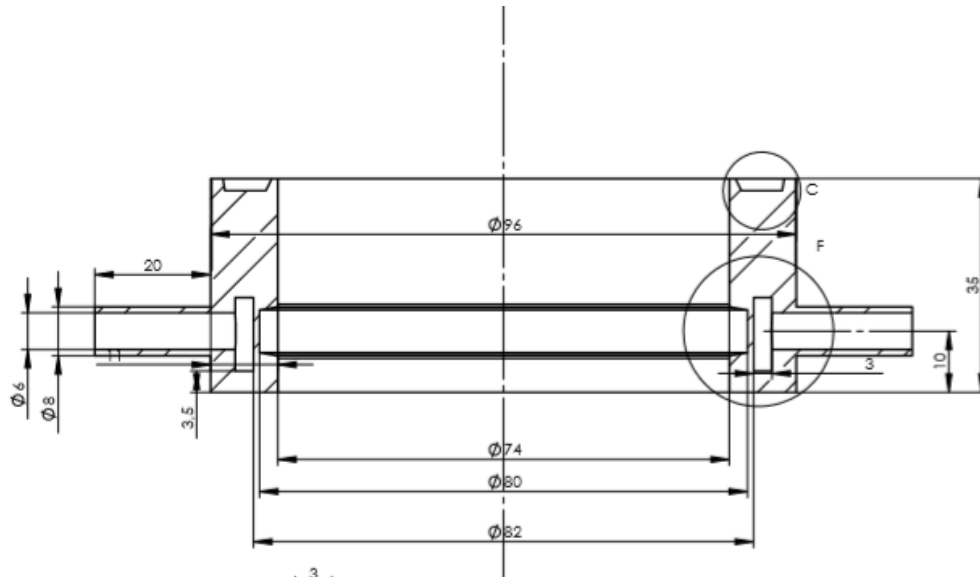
Technical draw of the injector – part 2 (dimensions are in mm).
